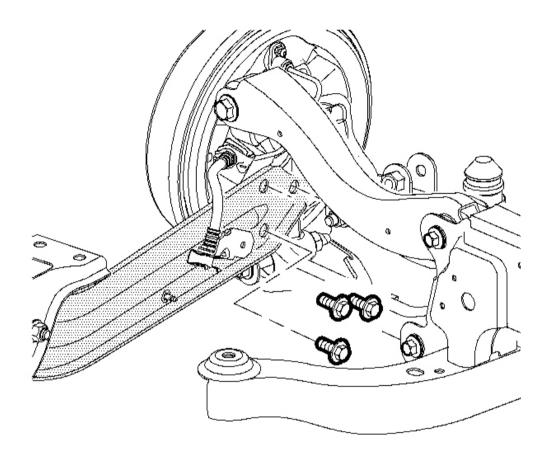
Trailing Blade & Knuckle Bolts Courtesy of GENERAL MOTORS CORP.
